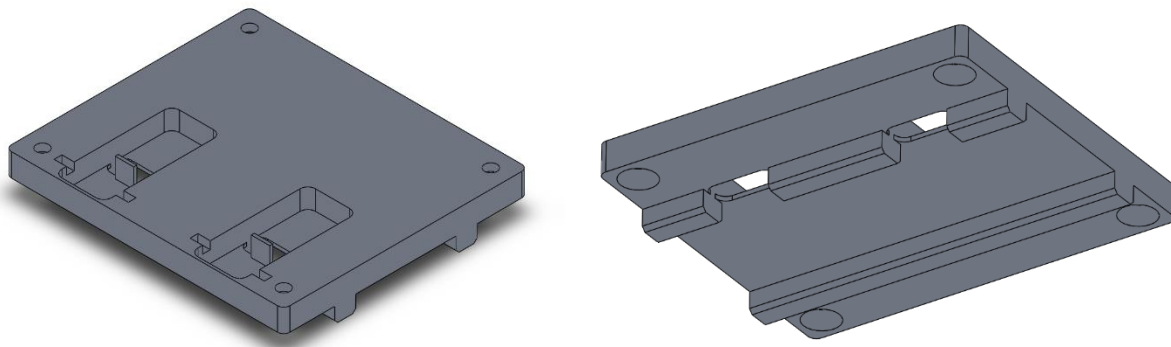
Quick Mounting plate (a) top view and (b) bottom view.
